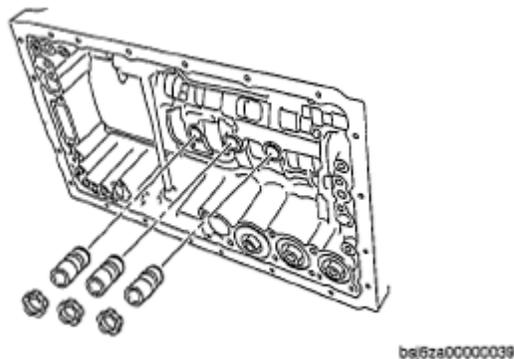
Identifying Transmission Case And Brake Drum Gasket
